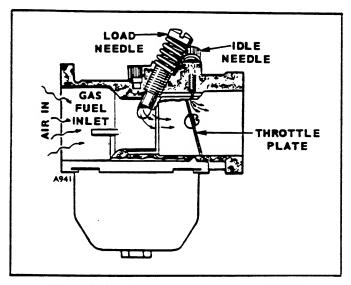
A. GAS CARBURETOR (CUTAWAY)
